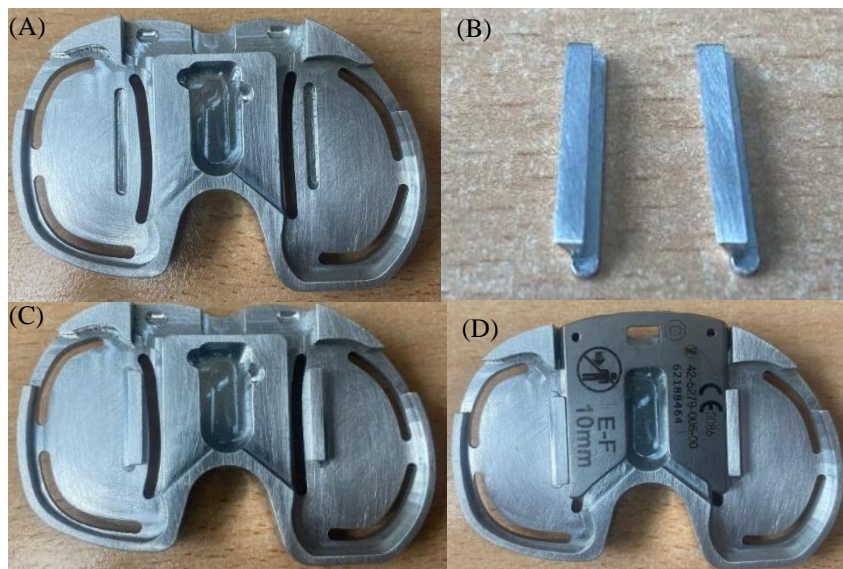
Re-design of Shim Inserts for Zimmer Specific design a) Bottom view without guides b) Guides c) Bottom view with guides attached d) Bottom view with guides and shim inserted
